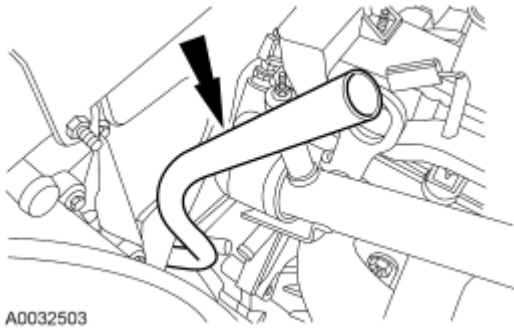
Locating Transmission-To-Engine Bolts
